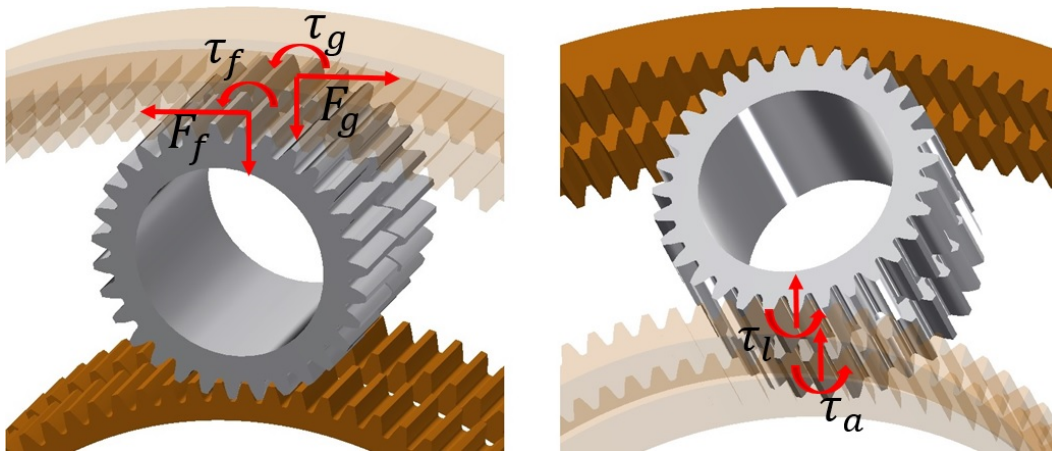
Planet meshing contact loads of the bearingless planetary gearbox.
